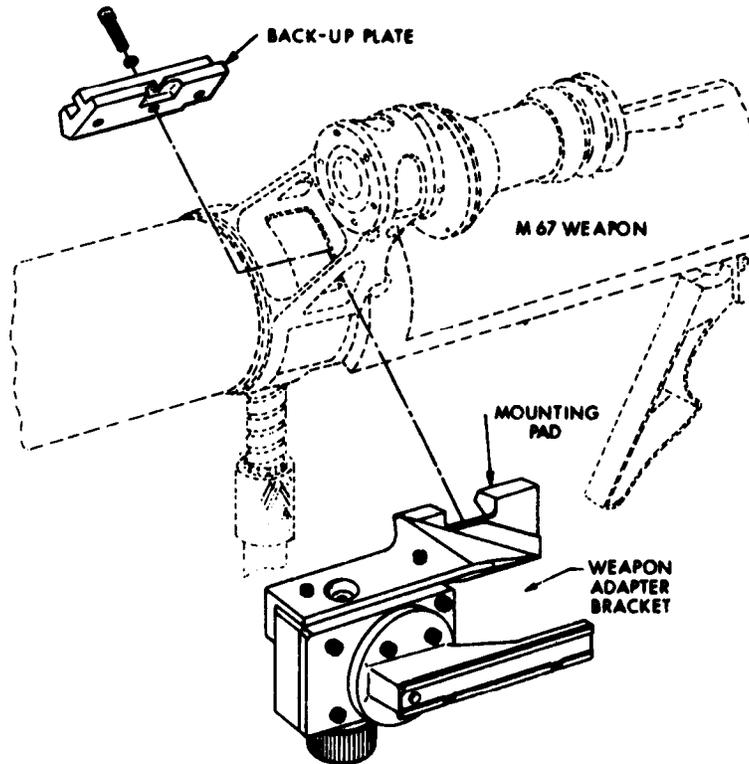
Installation of weapon adapter bracket to the 90-mm recoilless rifle M67.
